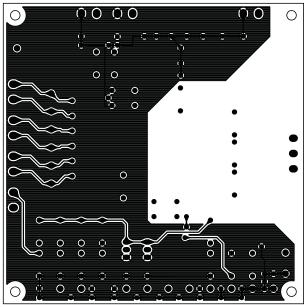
Bottom Layer, Copper Foil Pattern (Top View)
